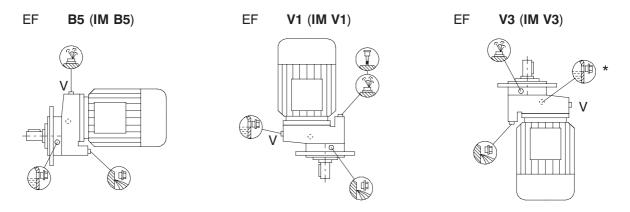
Mounting positions for EF Size 20 - 140
